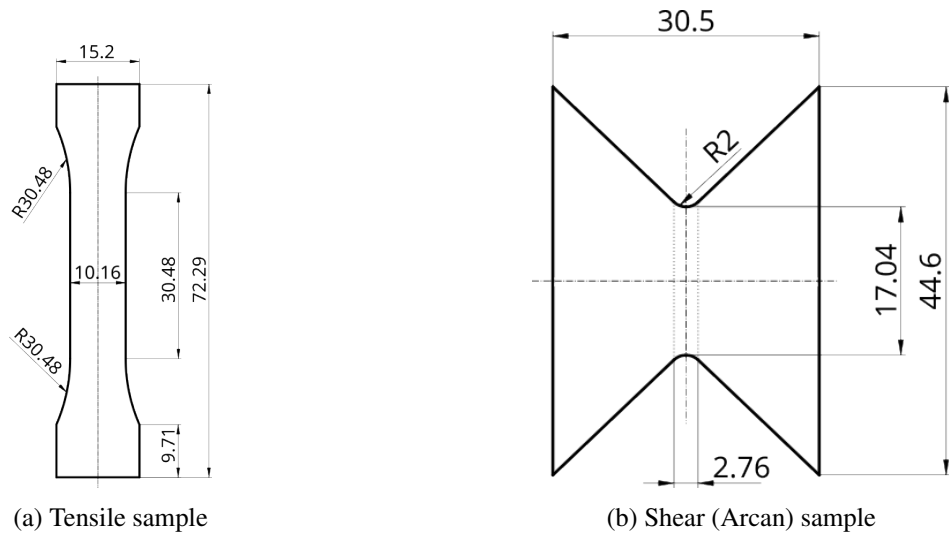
Geometry [mm] of samples used in tensile and shear experiments.
